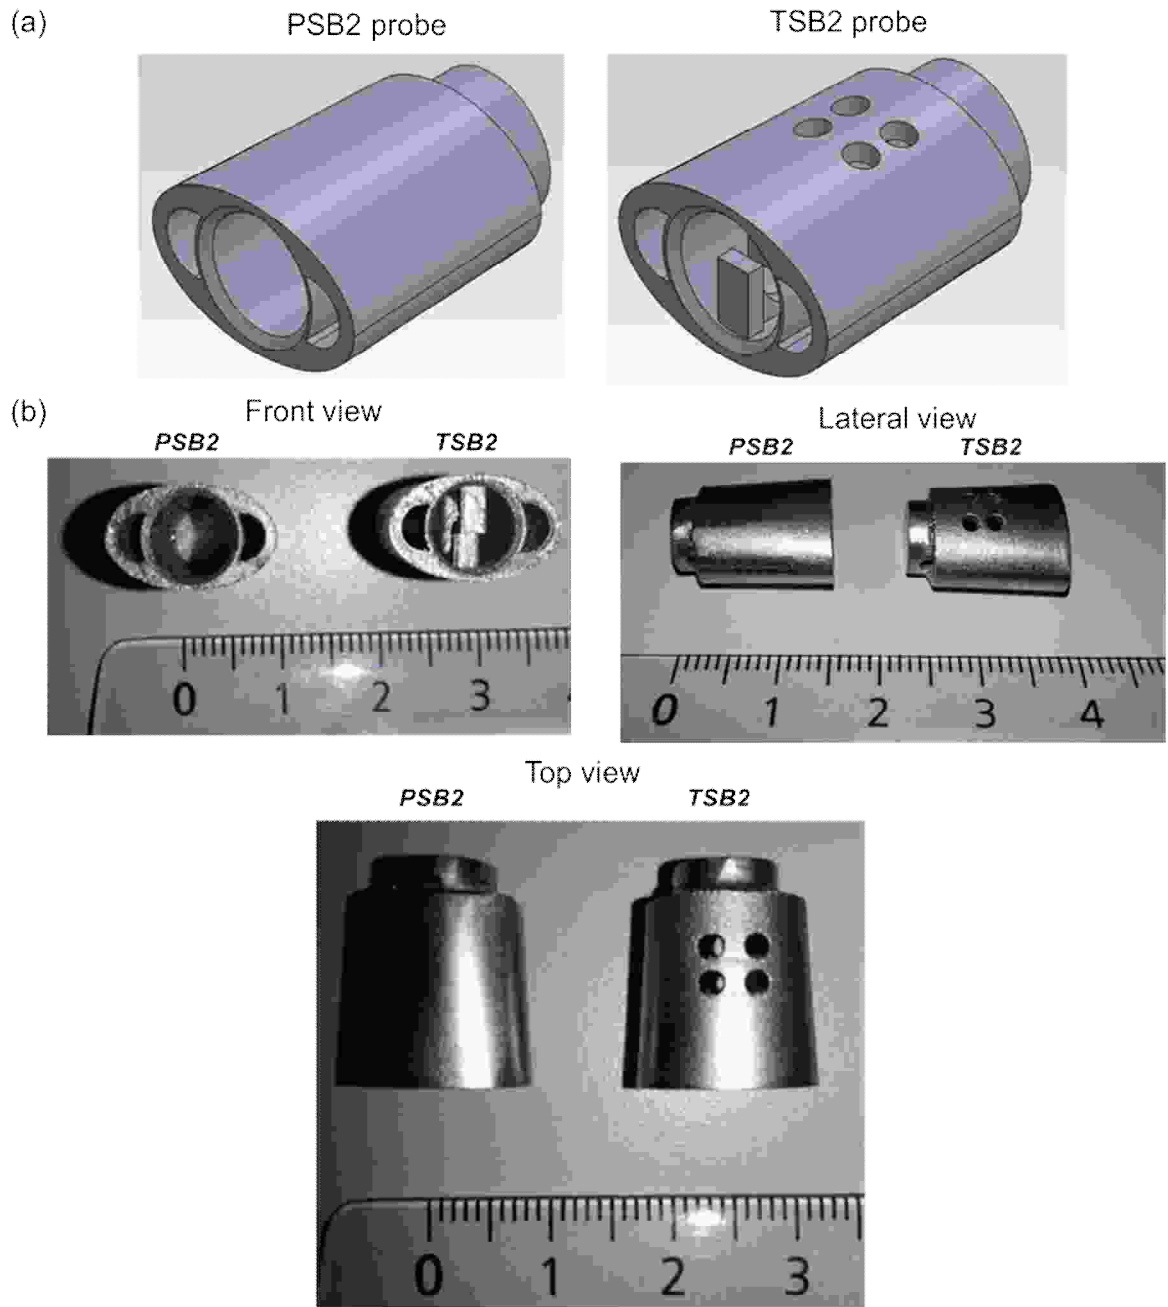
PSB2 and TSB2 probes. (a) CAD models; (b) manufactured prototypes.
